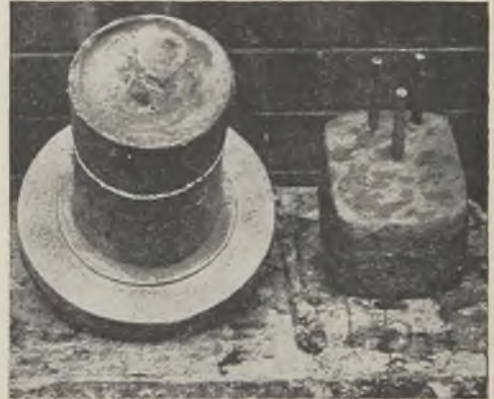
COUPLING CASTING AND PENCIL RUNNERS.
